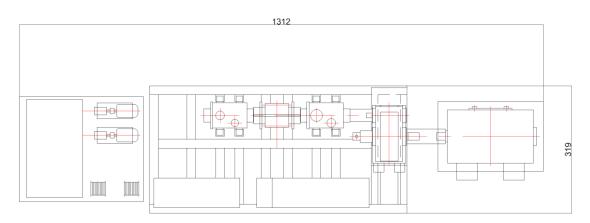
Typical layout of a MAN RB28–7 – Plant view
